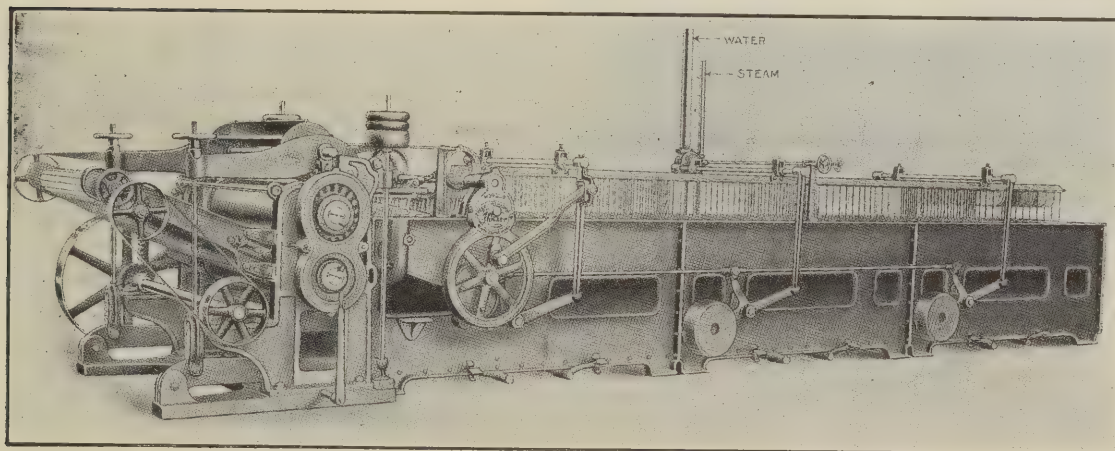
Scouring Machine of Rake Type—James Hunter Machine Company
